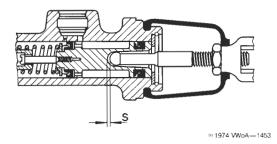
Required clearance S between the end of the pushrod and the master cylinder piston. It should be 1 mm (.040 in.).
